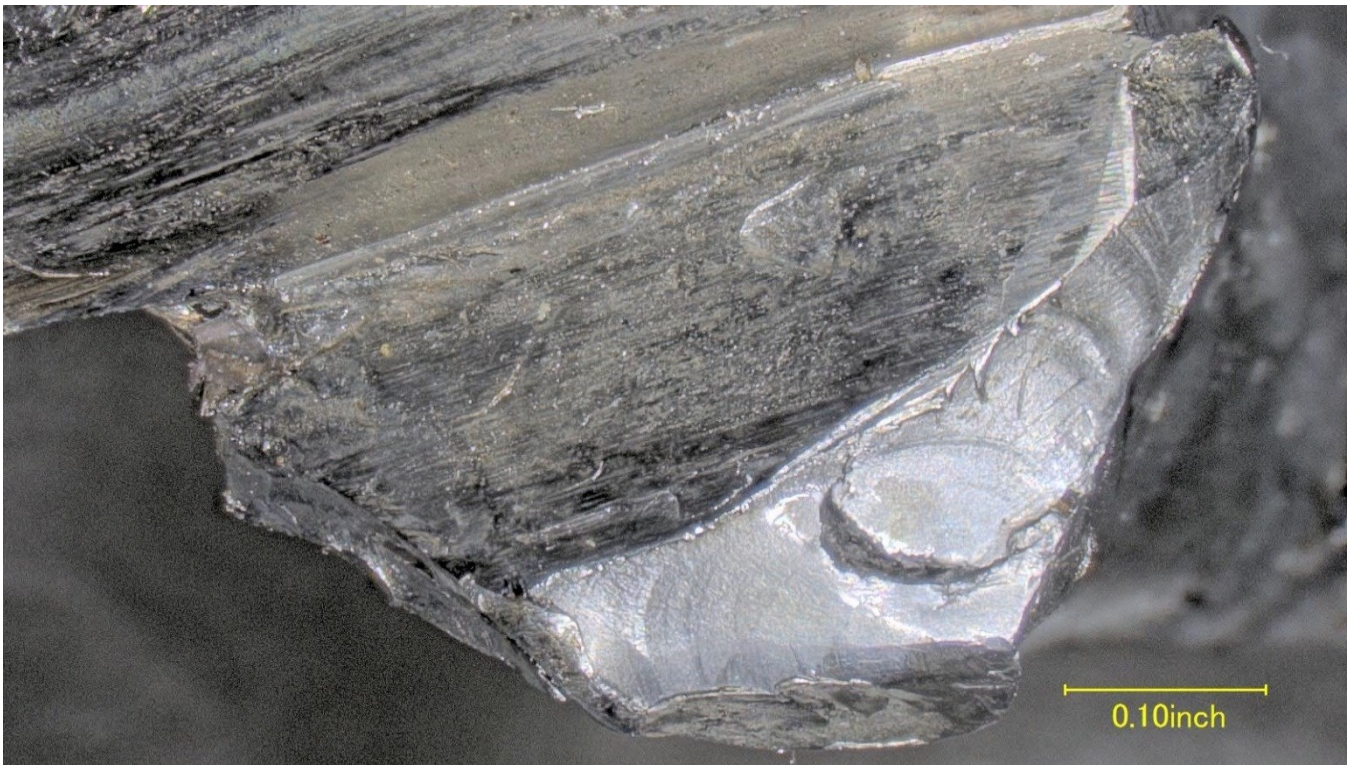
Closer view of the #1 rod fracture surface from the crank end, showing crack arrest marks (lower right).
